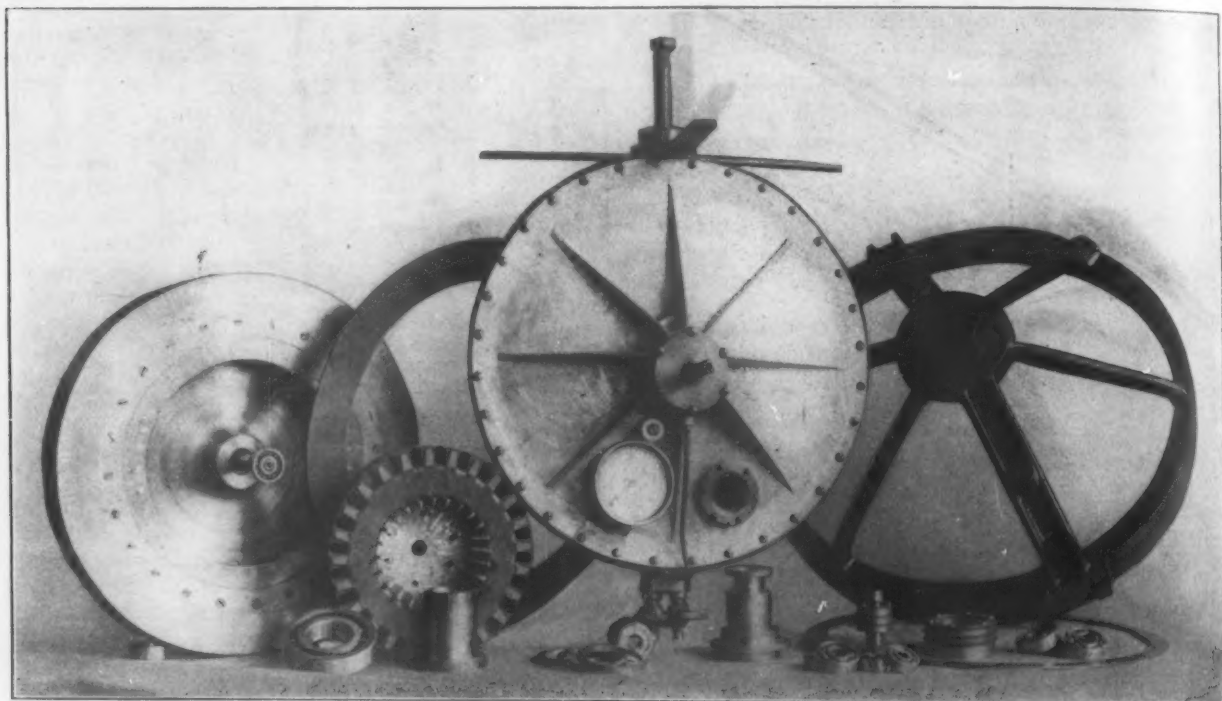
The Unassembled Parts of the Sperry Gyroscopic Compass.
